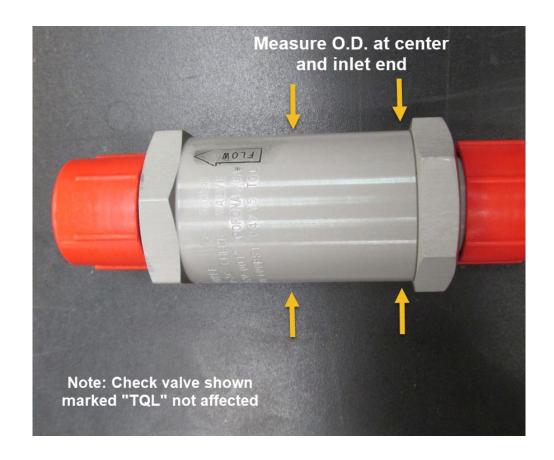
Engine Oil Check Valve Outside Diameter Measurement
